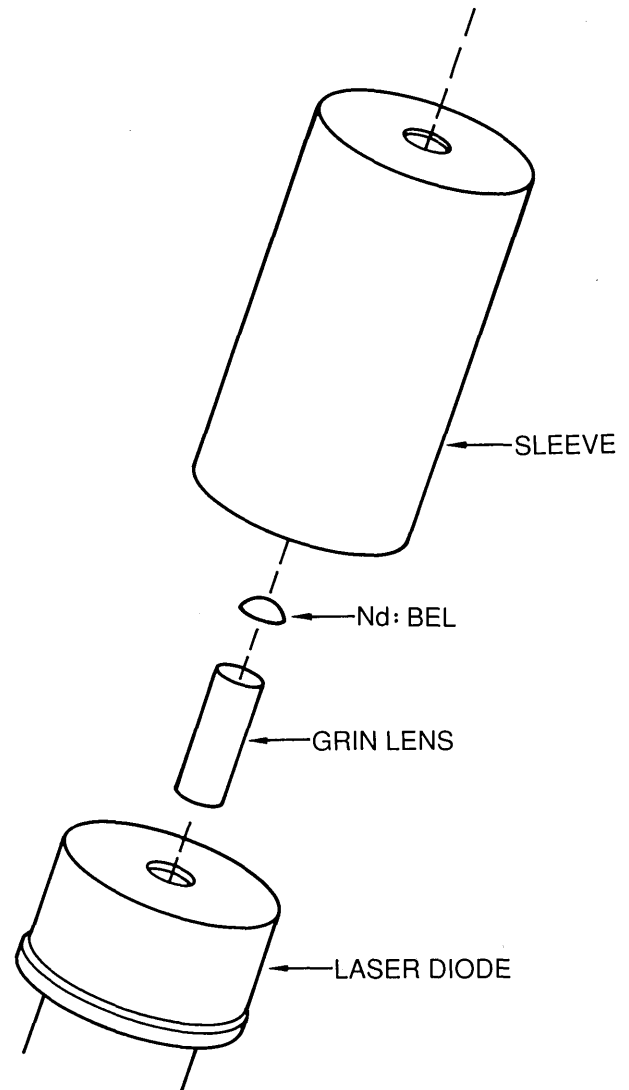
Exploded view of the miniature, integrated diode-pumped Nd:BEL laser.
